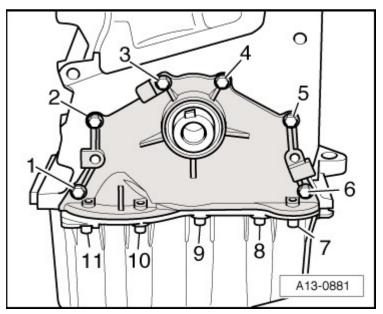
Identifying Sealing Flange Bolts Courtesy of AUDI OF AMERICA, LLC
